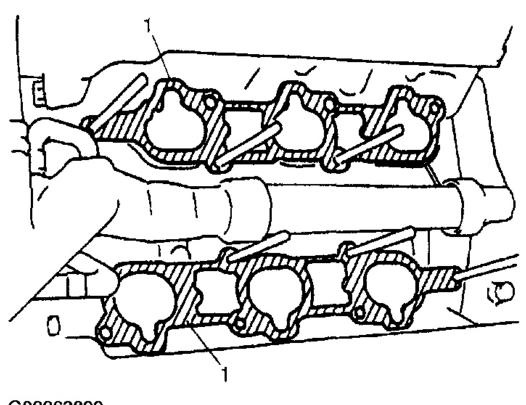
Removing Intake Manifold Bolts & Nuts Courtesy of SUZUKI OF AMERICA CORP.
